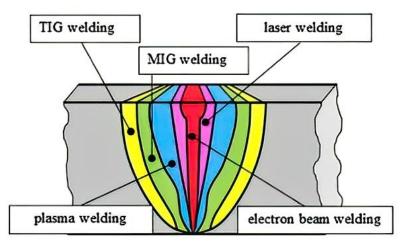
Weld cross-sections available with different welding processes [49]
